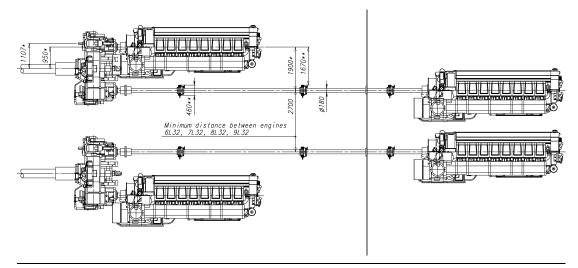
Main engine arrangement, in-line engines (DAAE059183)
